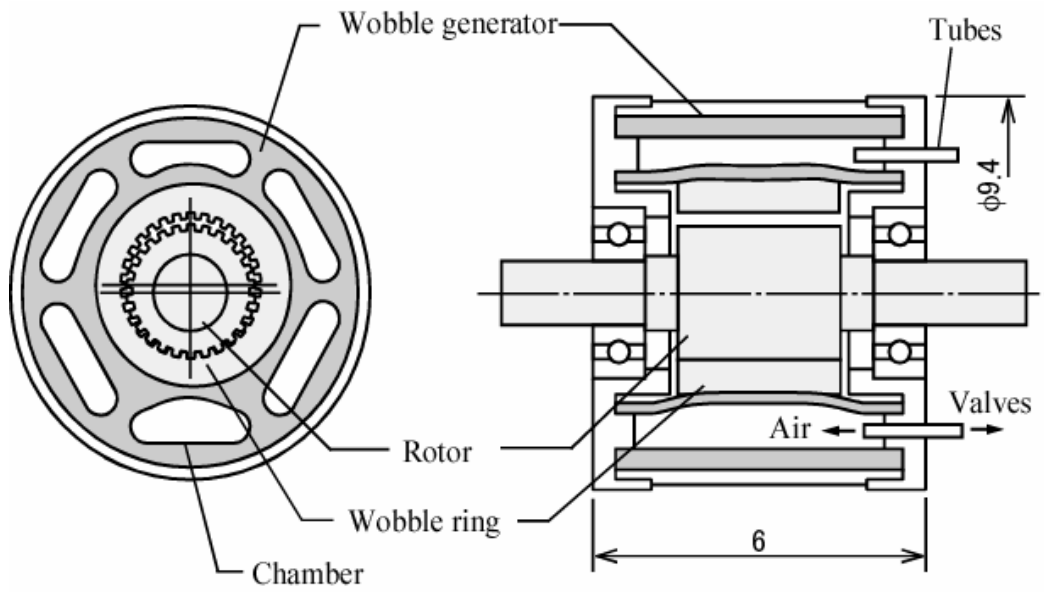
Cross-sectional view of pneumatic wobble motor
